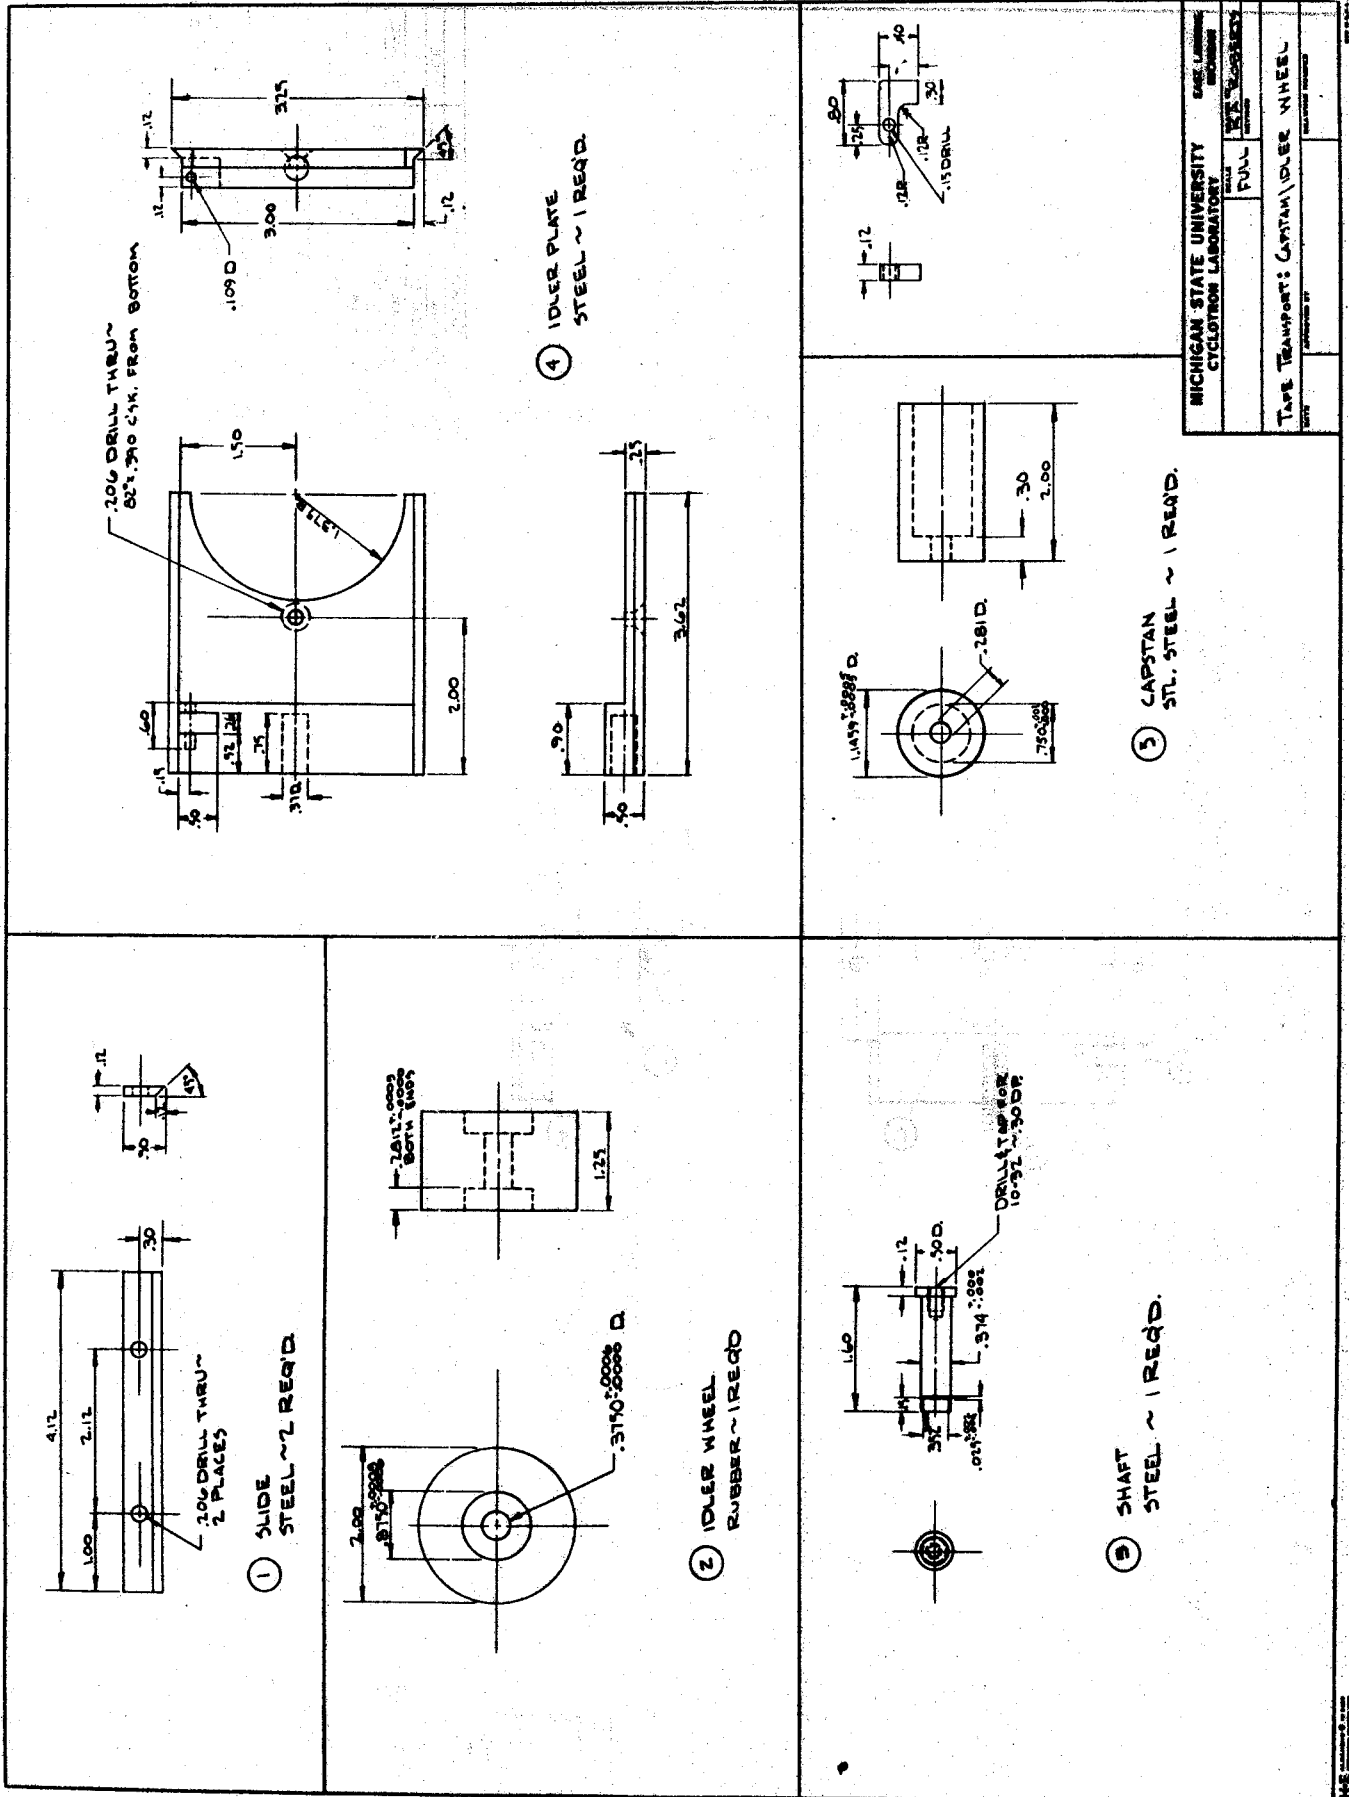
Detail Drawing of Tape Transport System, Box II. Capstan/Idler Wheel Assembly.
